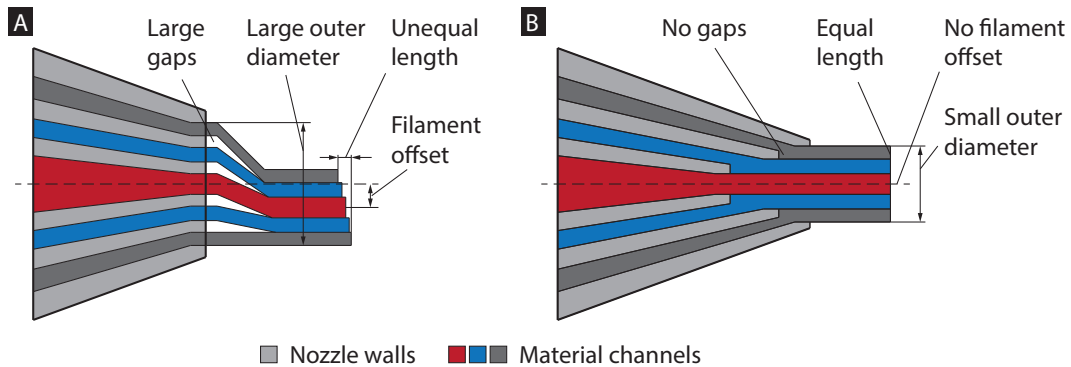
Conventional core-shell nozzle design (a) and improved design (b). The schematics show material exiting the nozzle of a printhead, forming a multicore-shell filament.
